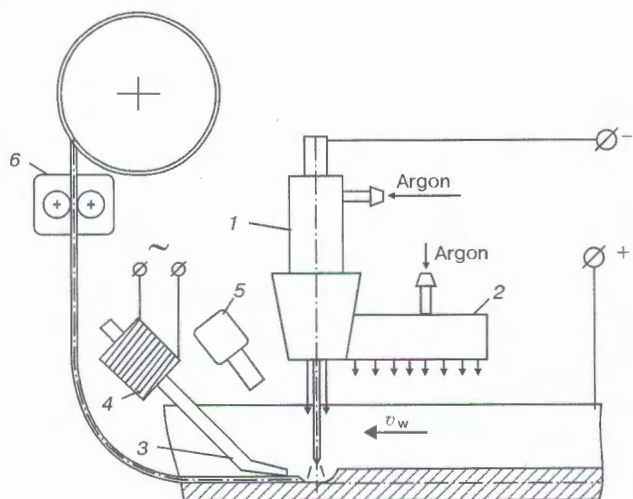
Scheme of automatic narrow-gap tungsten electrode magnetically-impelled arc: 1 — welding torch; 2 — shielding device; 3 — magnetic core; 4 — electromagnet; 5 — TV camera; 6 — mechanism of wire feeding
